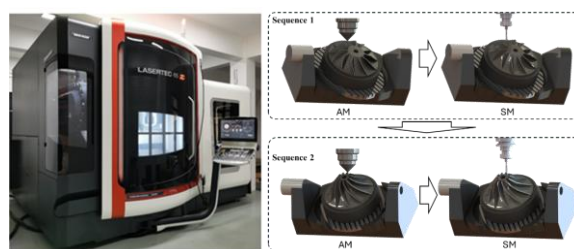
The DMG LASERTEC 65 3D Hybrid integrates an additive manufacturing system in the conventional CNC machine center.
